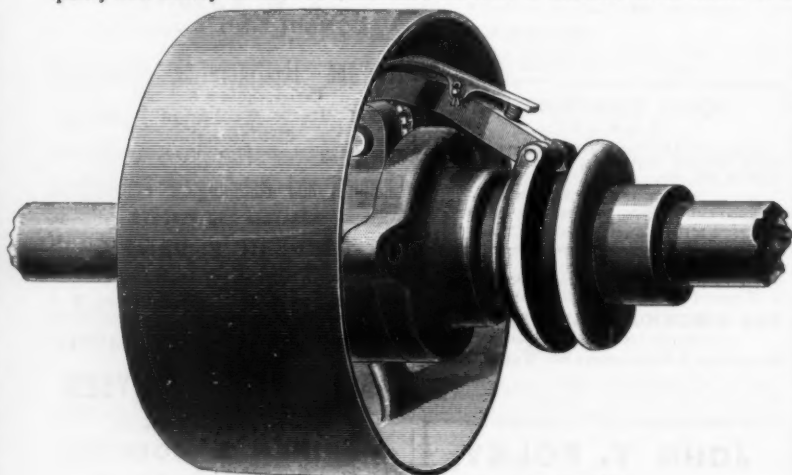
PULLEY CLUTCH AND CUT-OFF COUPLING.
